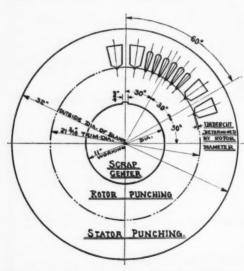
Complete stator-rotor blank before being separated. The slots are shown in the stator punching.
